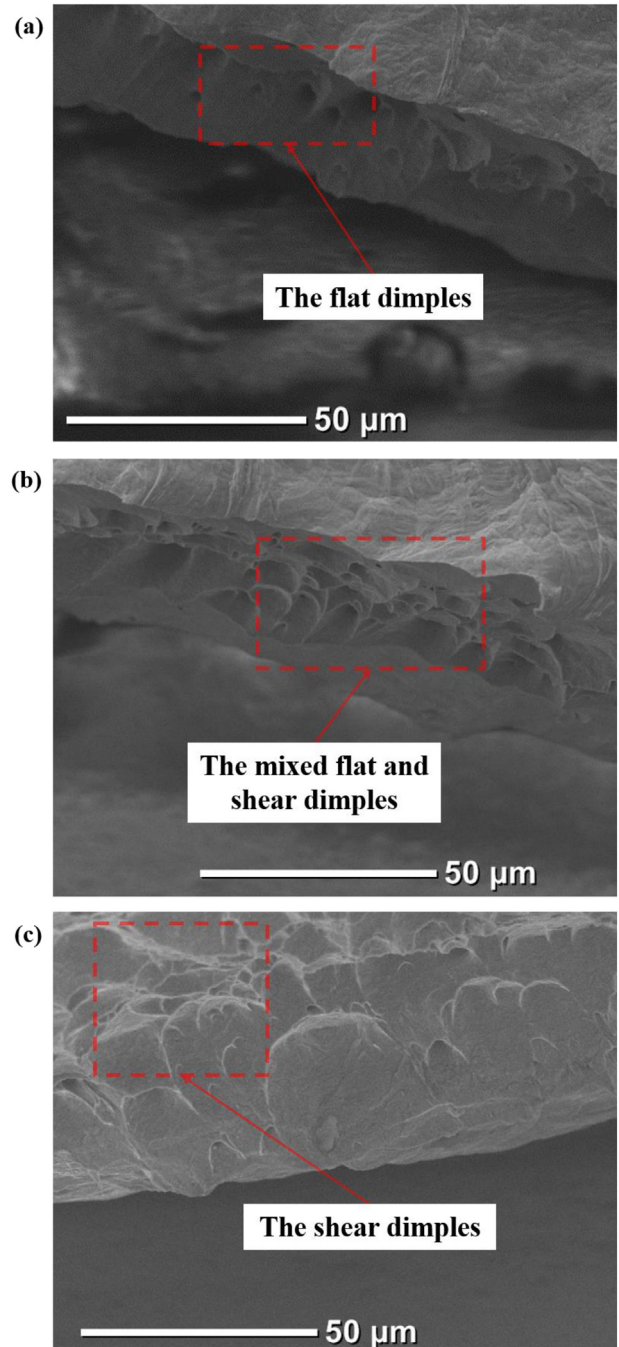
Different types of dimples in SEM fractography of metallic sheets in the combined tensile-shear sheet-45° test.
